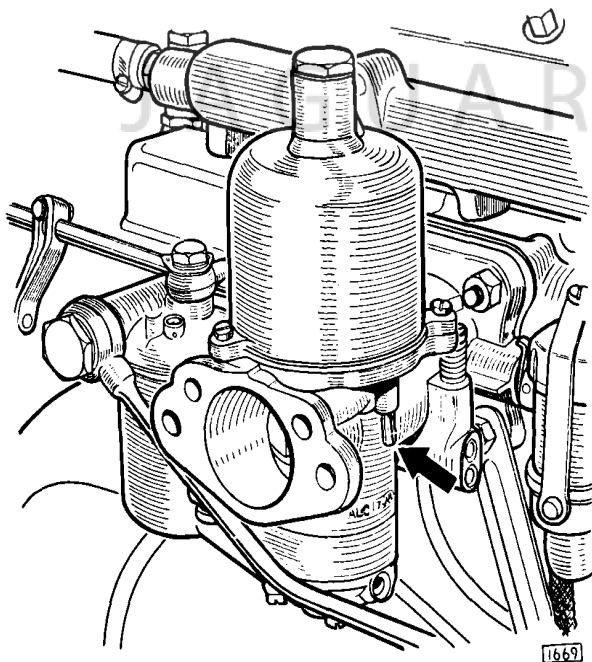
The carburettor piston lifting pin ; the first part of the movement is spring loaded free travel.
